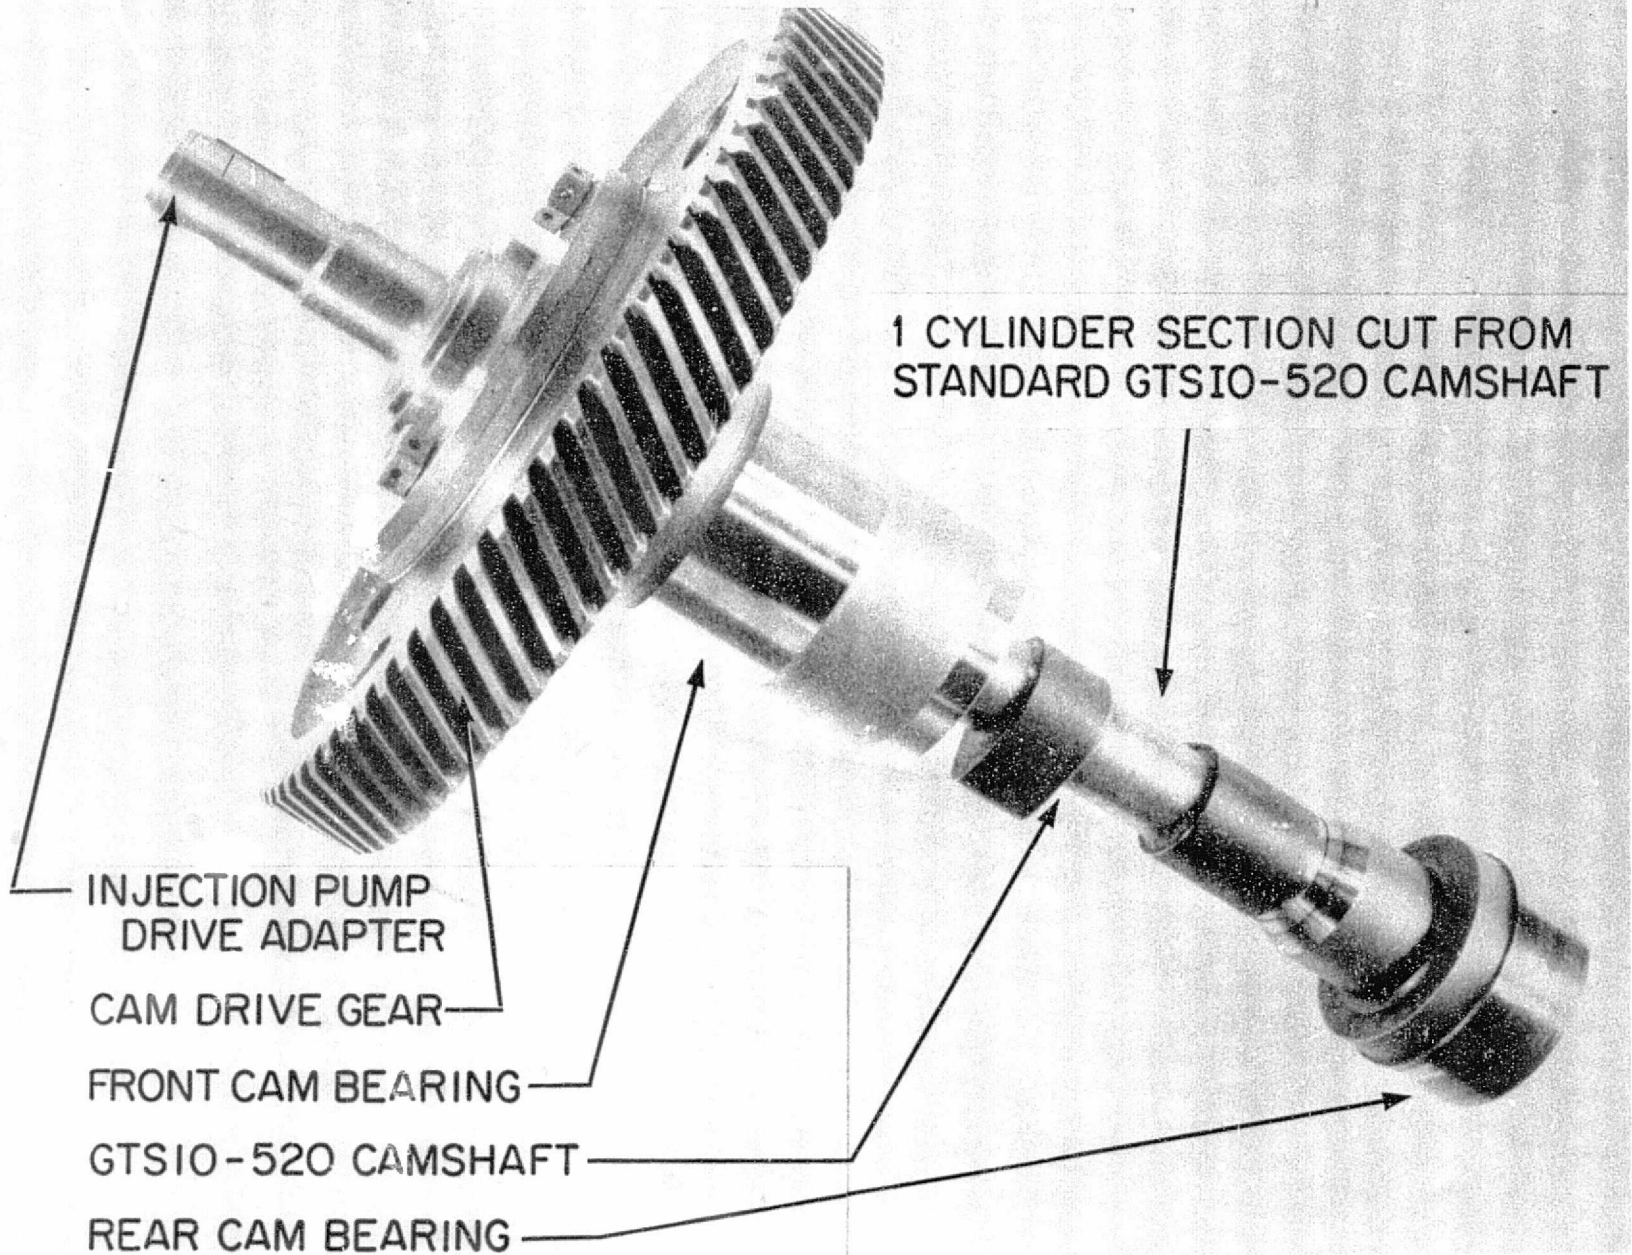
Camshaft Assembly showing GTSIO-520 Camshaft Modified
